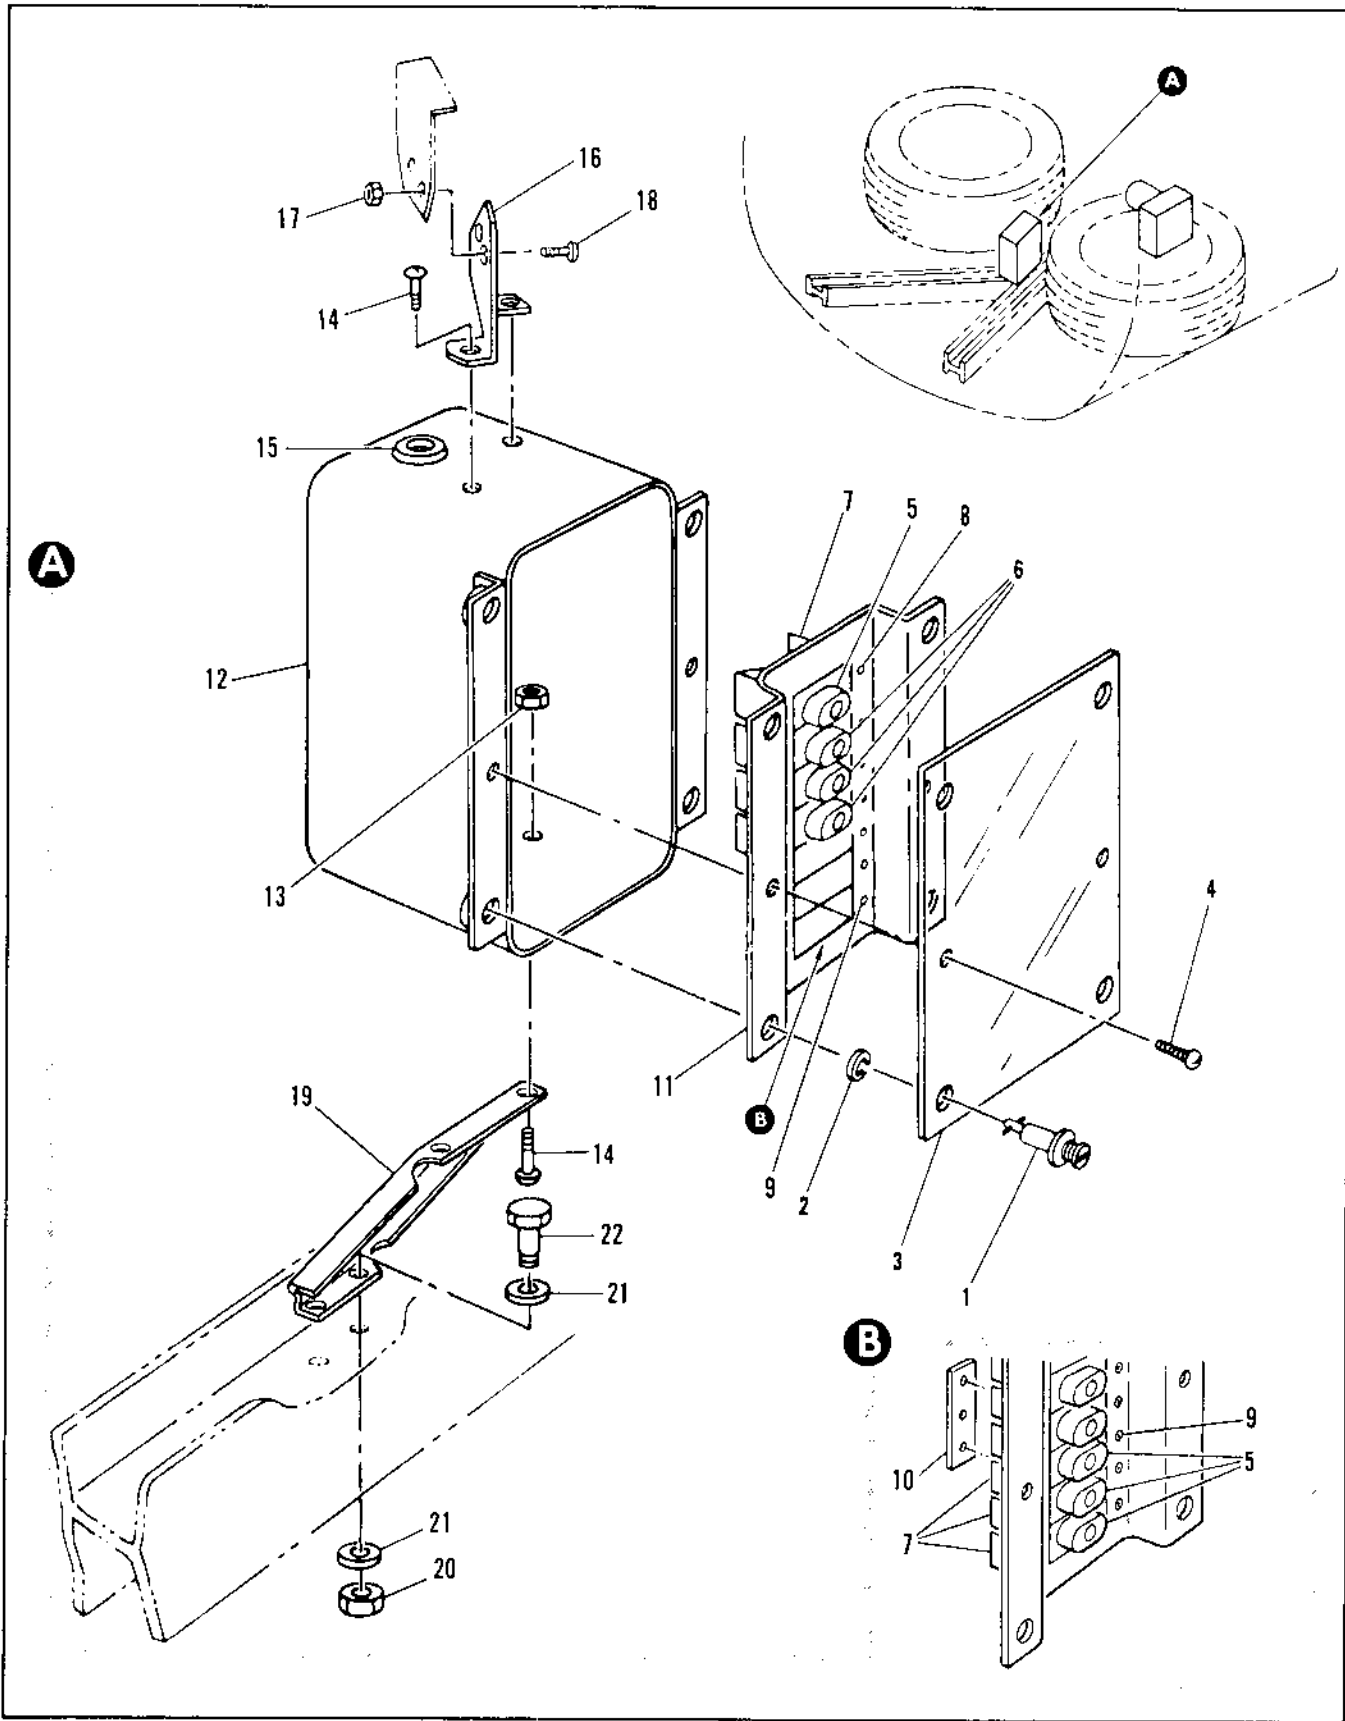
Main Wheel Well Auxiliary Circuit Breaker Panel
